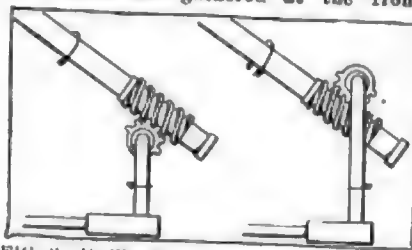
HOW ACTION OF STEERING GEAR MAY BE REVERSED BY LINKAGE
